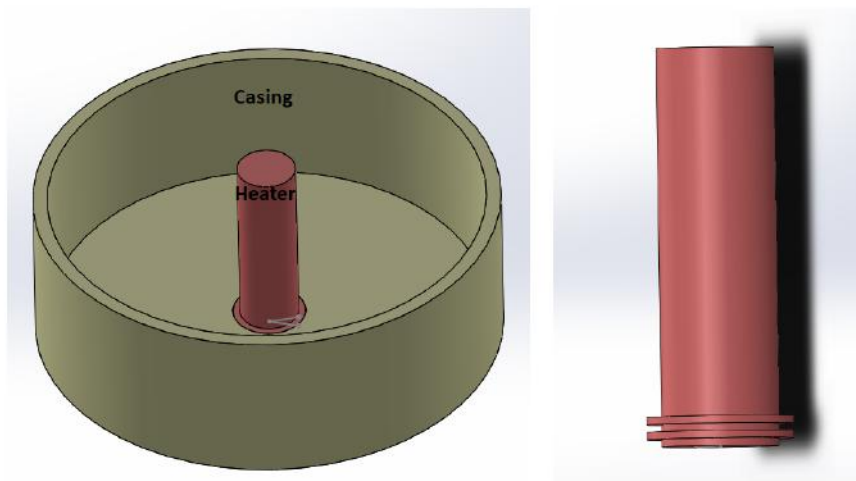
Enlarged open top actuator and heater design (on right side)
